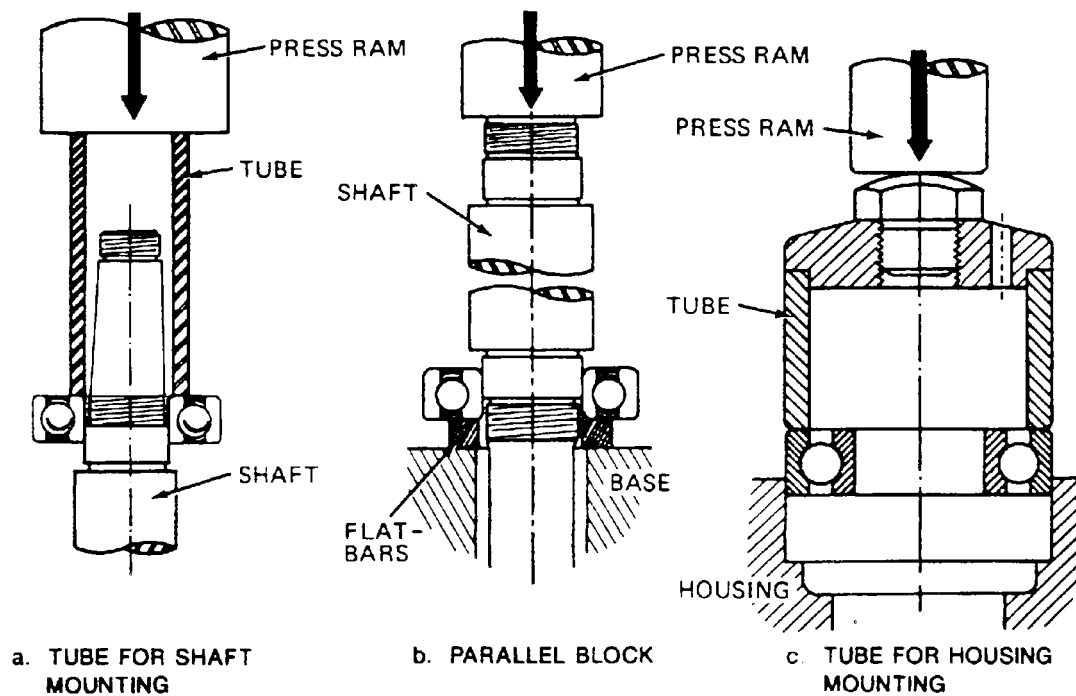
Pressing Bearings on Shaft with an Arbor Press
